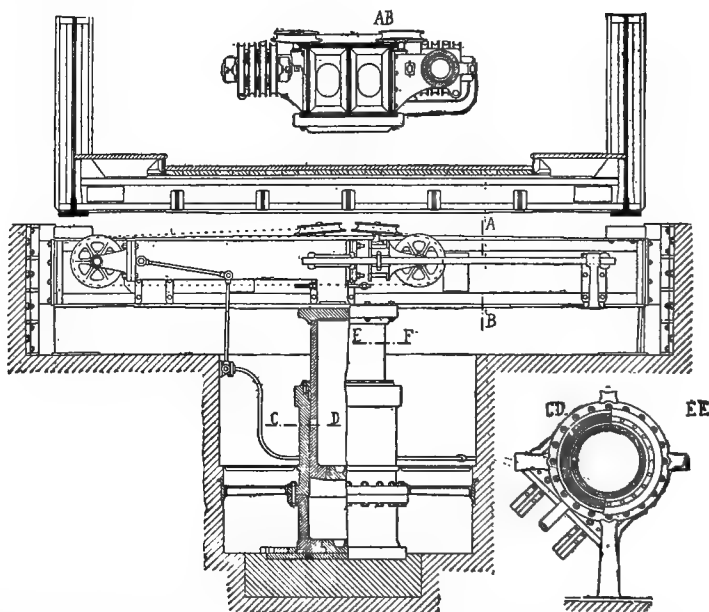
Section of the traversing bridge—Section A B of the box girder—Sections C D and E F of the lifting press.
